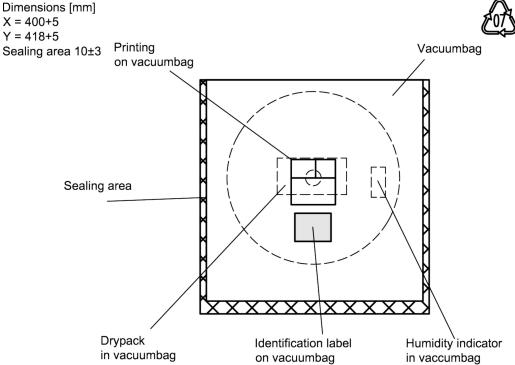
Drawing of moisture barrier bag (MBB) for reel with diameter of 330 mm.
